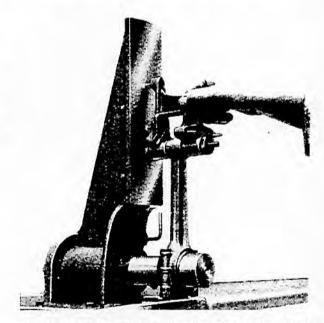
CHECKING ALIGNMENT OF CONNECTING ROD WITH ALIGNING JIG No. 335, ARBOR MF335A, DUMMY GUDGEON PIN AND INDICATOR No. 6202
